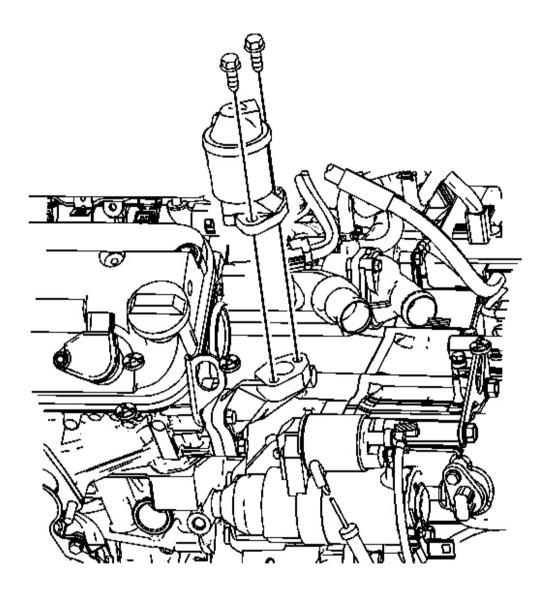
View Of Exhaust Gas Recirculation (EGR) Valve Courtesy of GENERAL MOTORS CORP.
